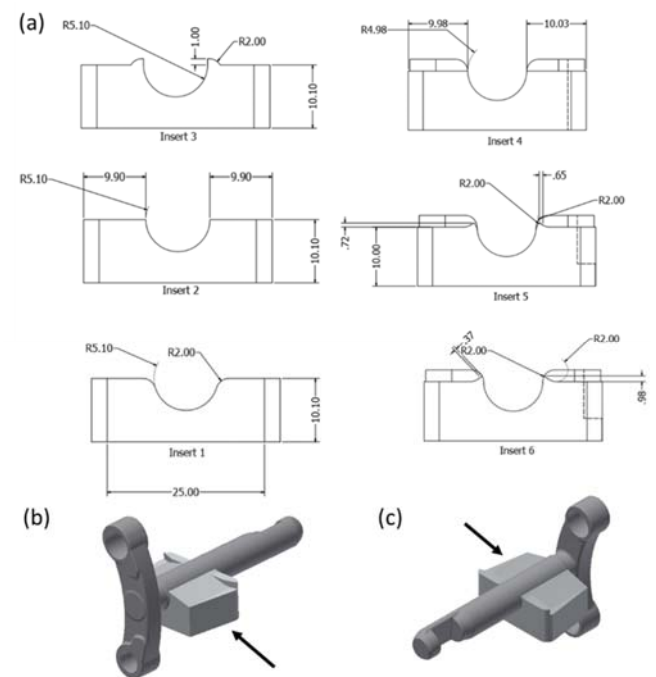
(a) 3D printed insert insulation variations (b) Insert and rod assembly rear (c) Insert and rod assembly front (black arrow denotes flow direction).
